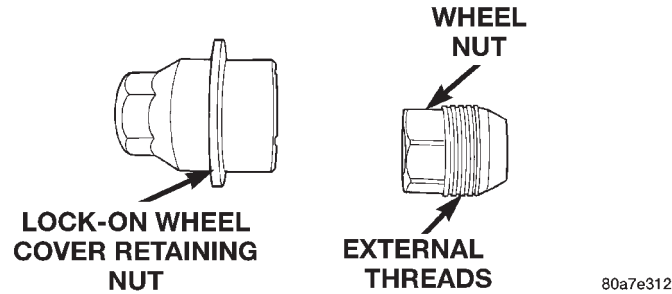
Wheel Nut And Wheel Cover Retaining Nut
